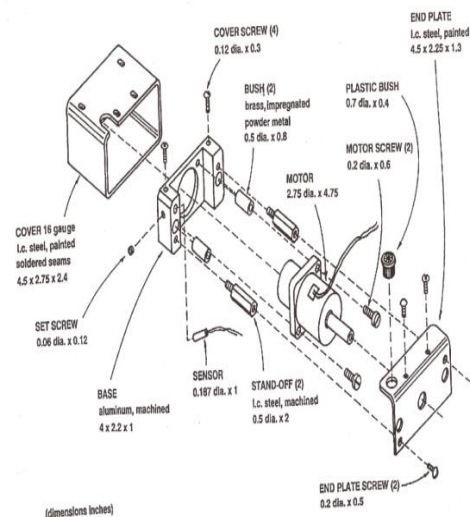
Original design of motor drive assembly (dimensions in inches) [2]
